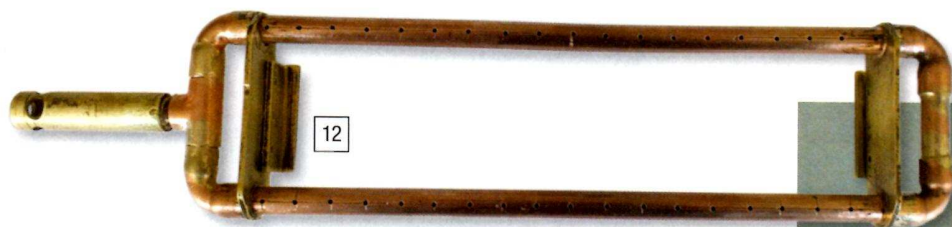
The final diameter of the poker holes was determined by testing with the boiler. These were eventually optimised at 1.9mm diameter which gives sufficient 'oomph' to maintain pressure at about 30 to 35psi with the engine running at a speed to realistically propel the yacht, but without wasting steam and gas by 'blowing off'. However, it must be said that the final hole size was determined after practical on the water steaming trials subsequent to this last picture.
